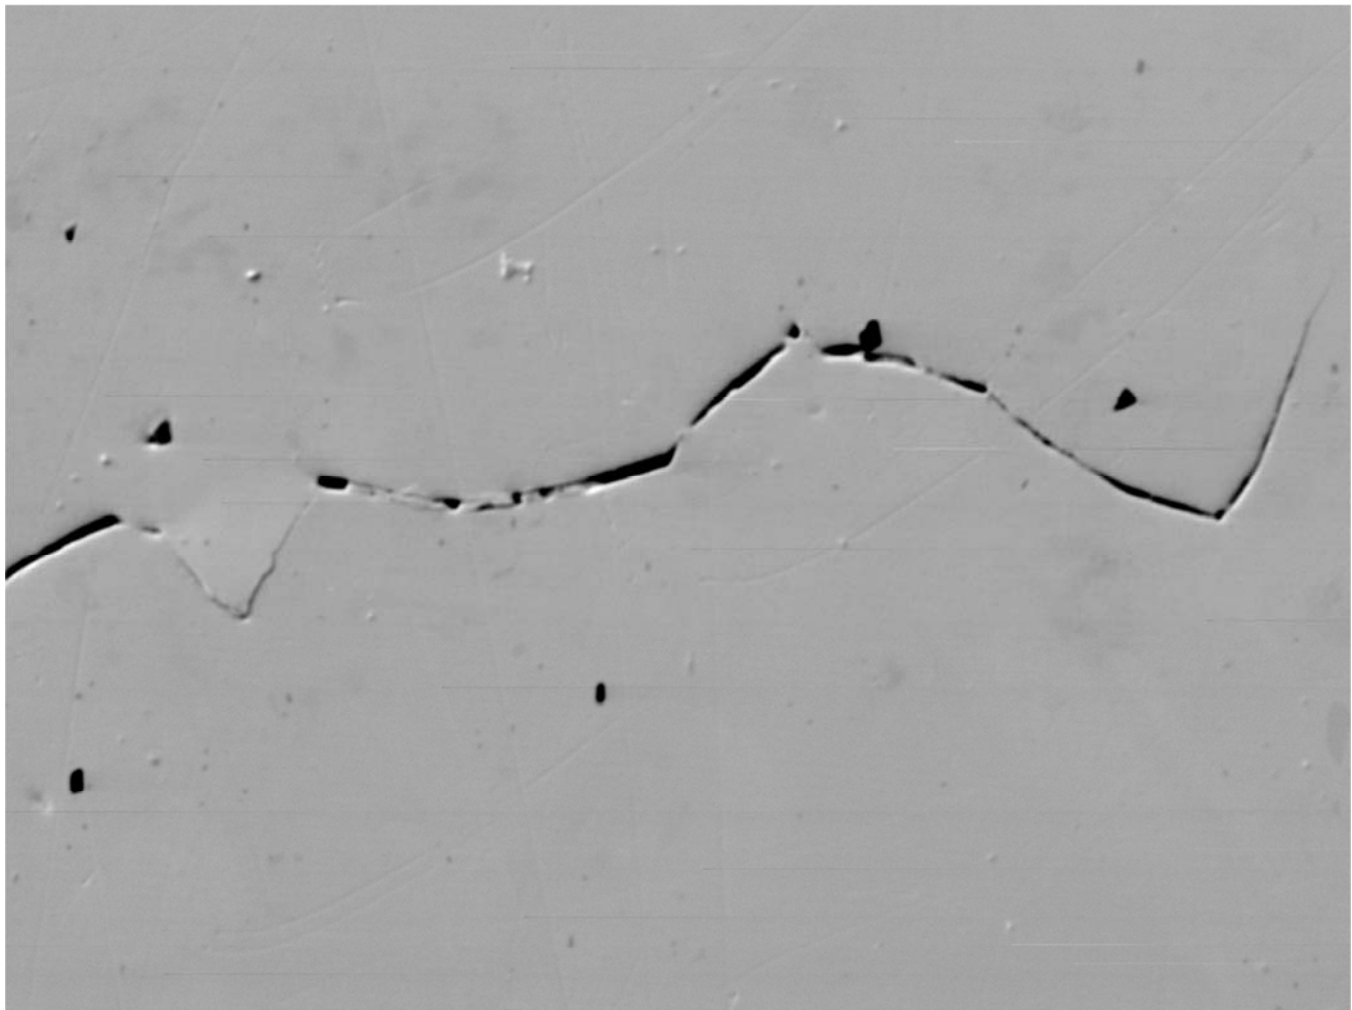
Metallography of the cross section of the threaded section of nozzle A at the fracture surface showing a lack of branch cracking.
